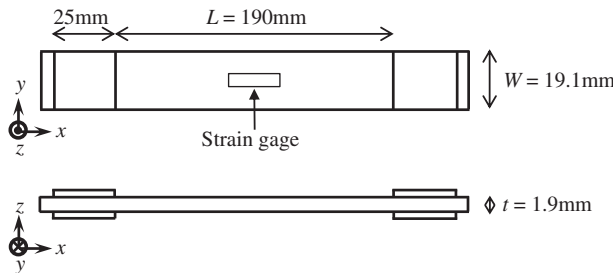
Dimensions of coupon specimens for uniaxial off-axis tensile tests.
